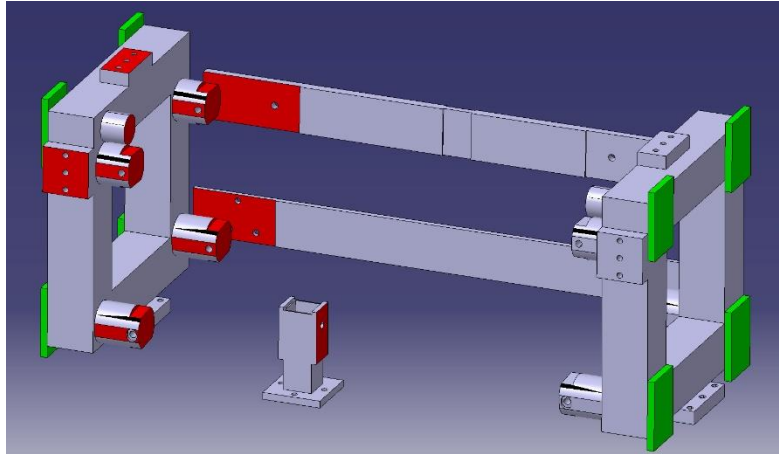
Welding Tools: Rear Frame Tool.
